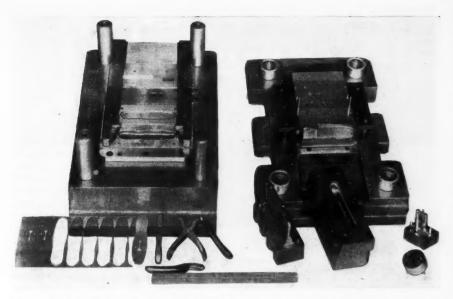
Illustration of High Speed Progressive Die Designed for the Production of 80 Right or Left Hand Plier Handles per Minute (Courtesy Moore Special Tool Company)
